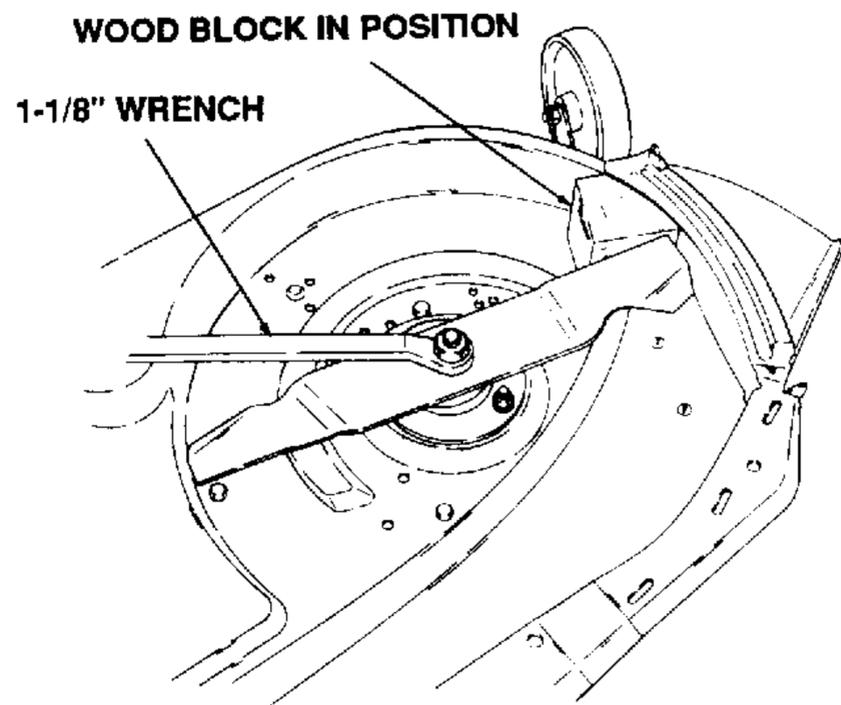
Loosen Hex Nut Securing Cutting Blade.
